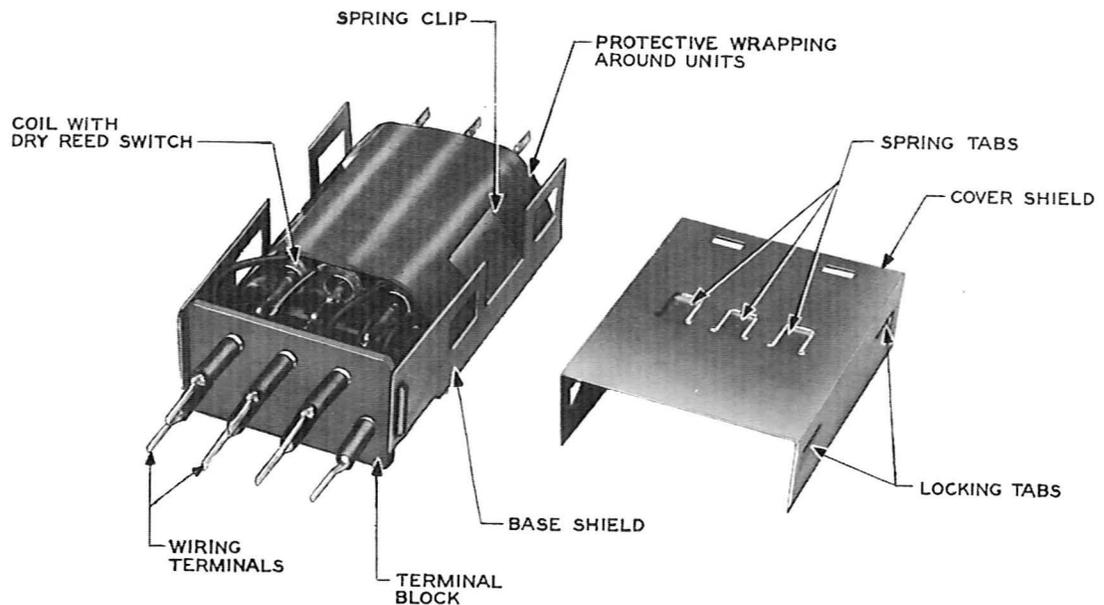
289-Type Relay With Cover and Cover Shield Removed (Bottom View)
